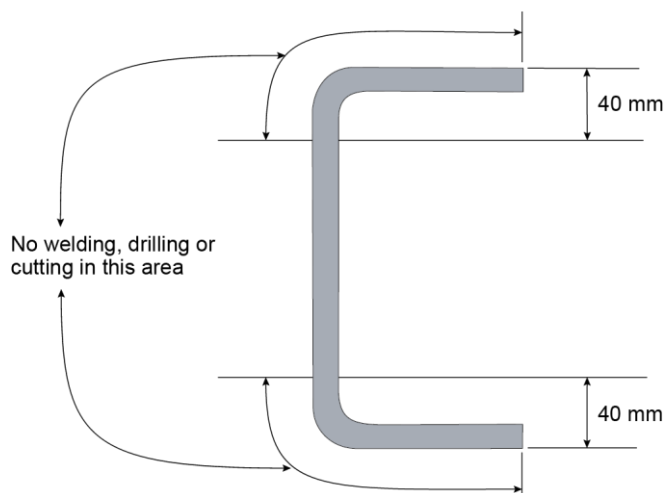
Diagram of welding, drilling, and cutting prohibited area
